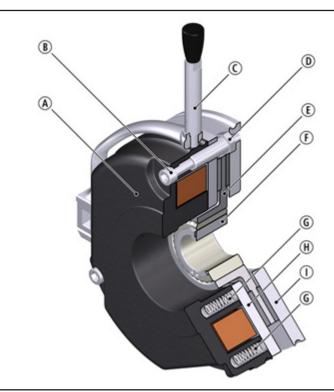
Design of the INTORQ BFK458 spring-applied brake: Basic module E (complete stator) + rotor + hub + flange
